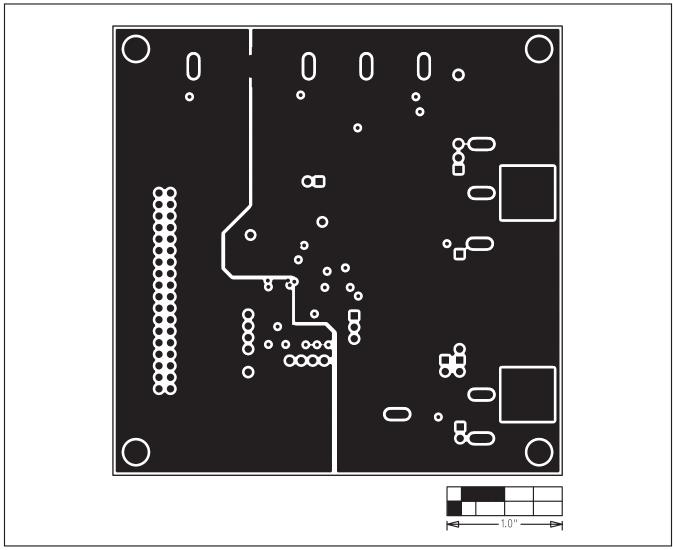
MAX5661 EV Kit PCB Layout—Layer 2 (GND)
